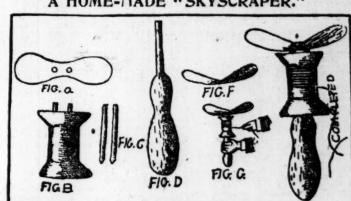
Figure A is a piece of tin cut into the shape pictured, with two holes in Figure B is an ordinary thread spool. Figure C is a nail (2) with the head cut Drive the nails into the top of the spool so that Figure A will fit on it loos Figure D is a piece of wood cut into the shape pictured, and Figure B is place on it so that it can turn easily. Wrap a string around the spool. The string to be pulled to put the spool in operation. Figure A must be twisted up a little
